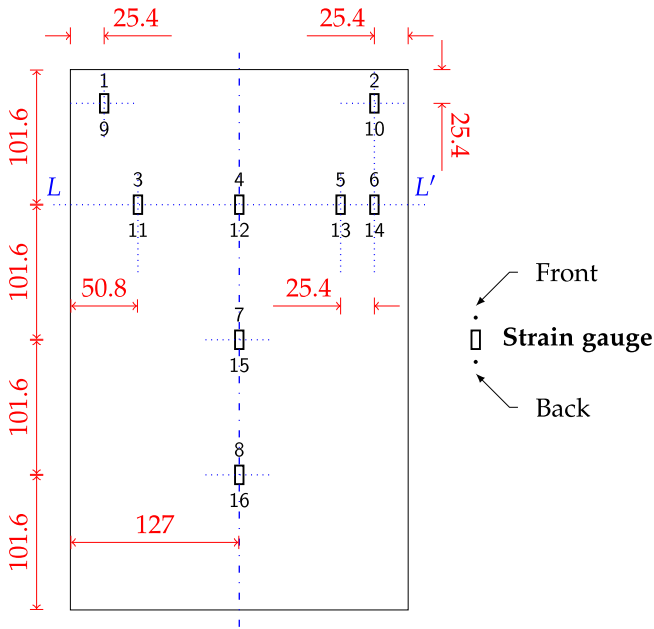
Locations of strain gauges (all dimensions in millimeters).
